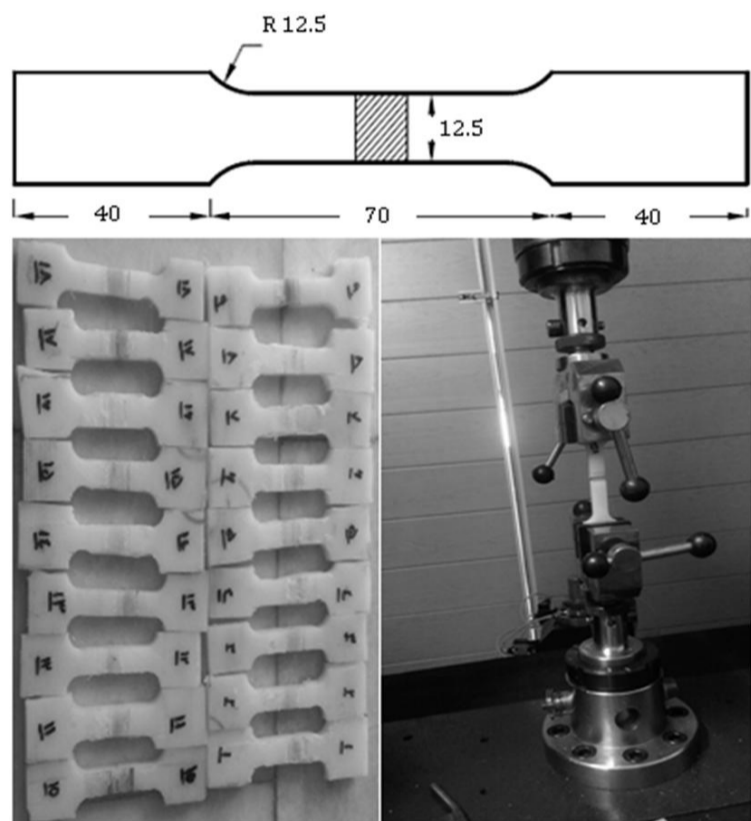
Profile specimens and tensile test (dimentions to mm)
